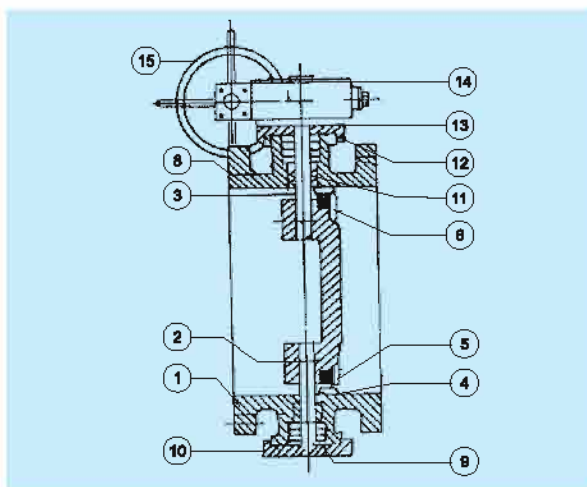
Double Flanged Type (50 - 1600 mm)
